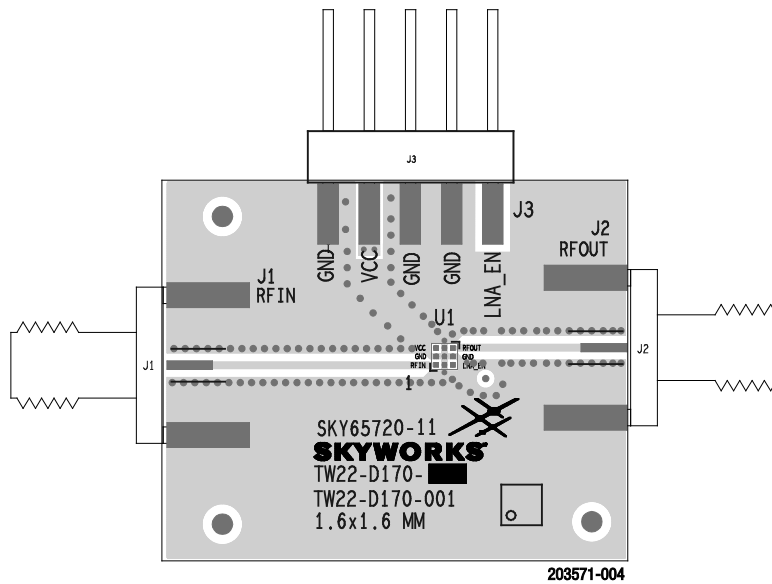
SKY65720-11 Evaluation Board Assembly Diagram
